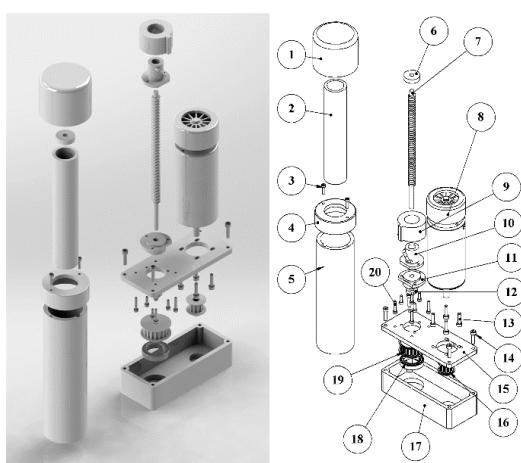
Exploded view of electrical linear cylinder (left) and the components (right)
